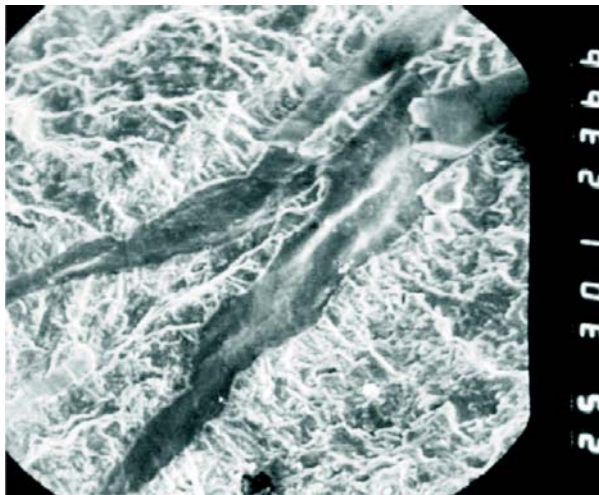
Secondary initiation cracks at inclusions (sulphide), specimen No. K1 cut from the crankshaft
